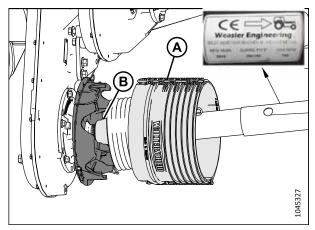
Driveline Installed on Float Module Gearbox Shaft
